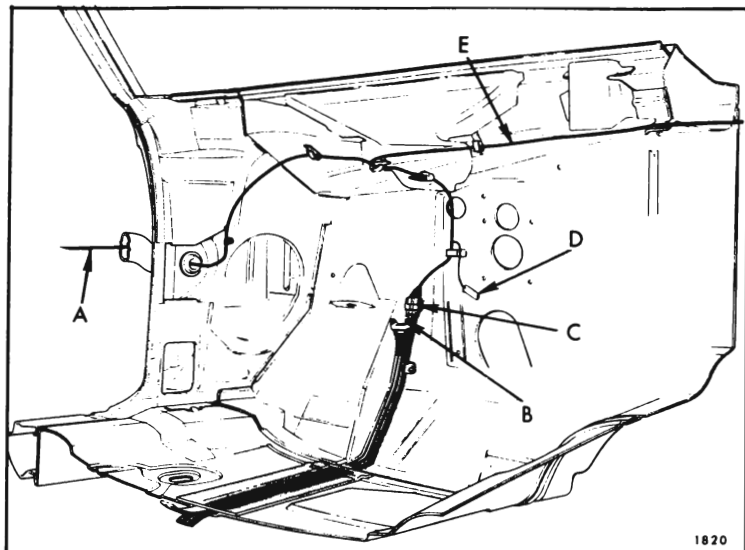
Front End Power Window Wiring - Buick "B & C"
